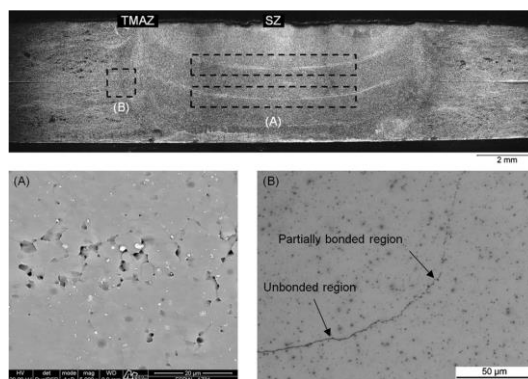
Optical microstructure of a friction spot weld between AZ31 similar sheets at the welding parameter of 1500 rpm, 2.75 mm of the penetration depth and 1 s of the welding time. (A) Bonding ligament and (B) hook [37]
